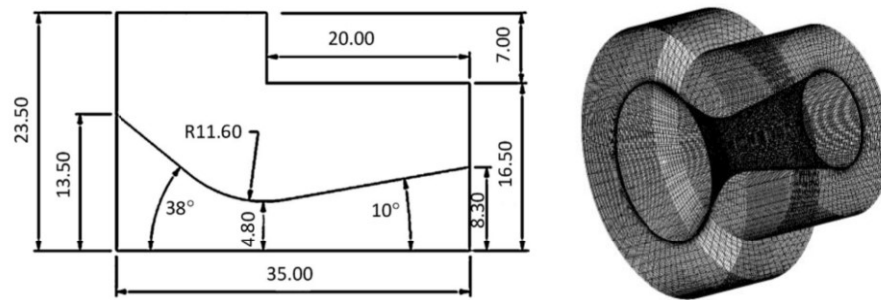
Design of complete subscale UHTCMC nozzle, for UNINA hybrid rocket testing. Dimensions are in mm.
